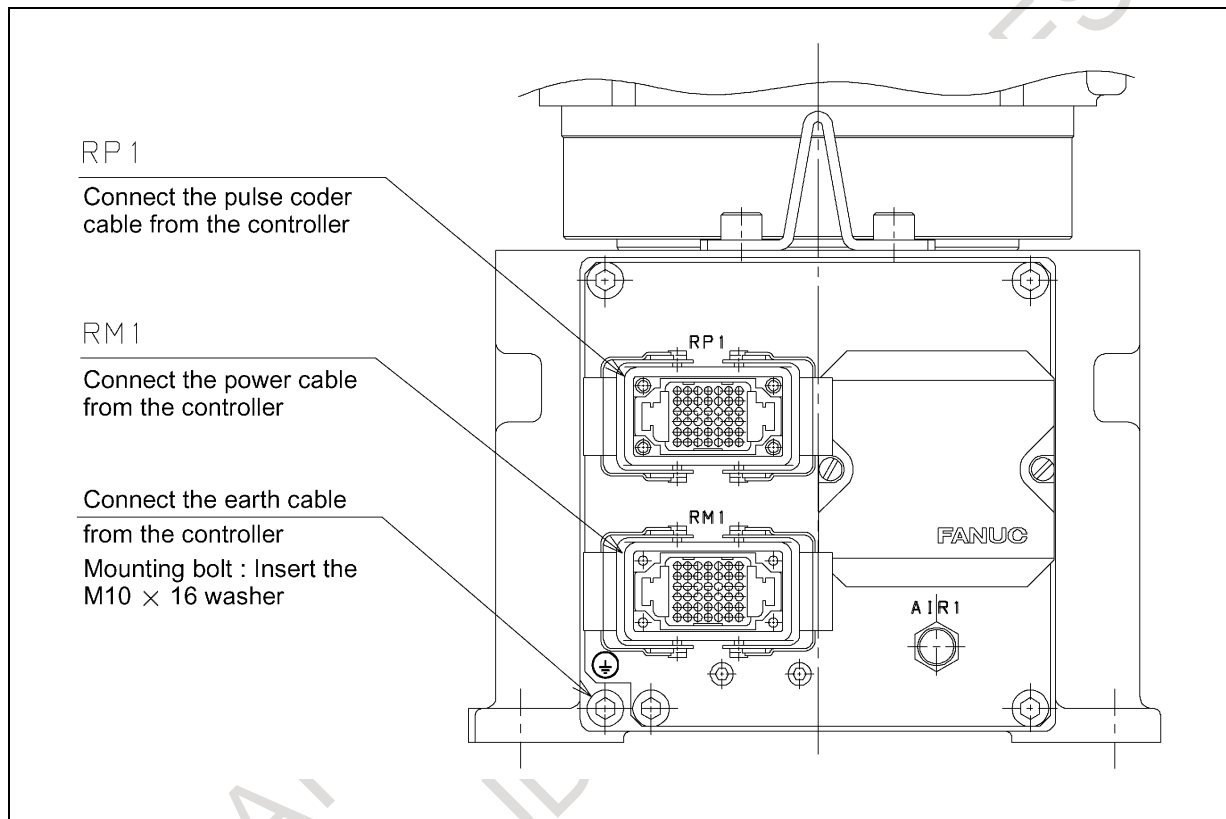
(a) Cable connection panel for the robot mechanical unit
